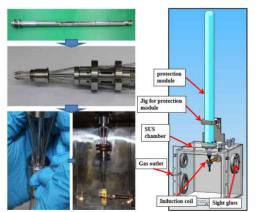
Sealing process of the instrumentation feed through part using a vacuum induction brazing.
